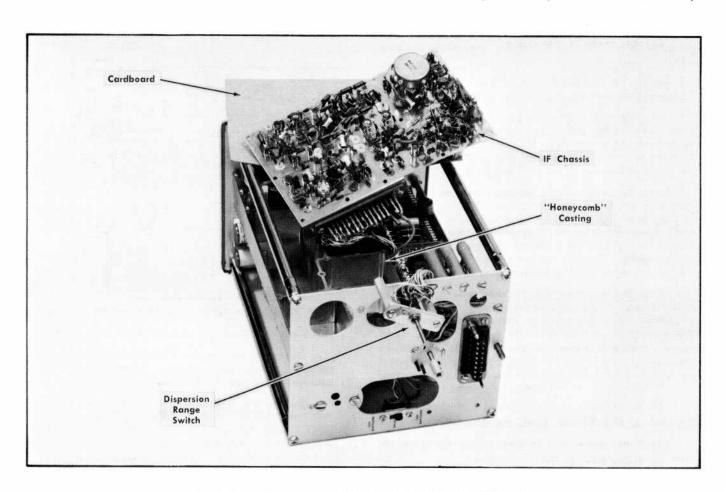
One method of removing the IF chassis for troubleshooting.
